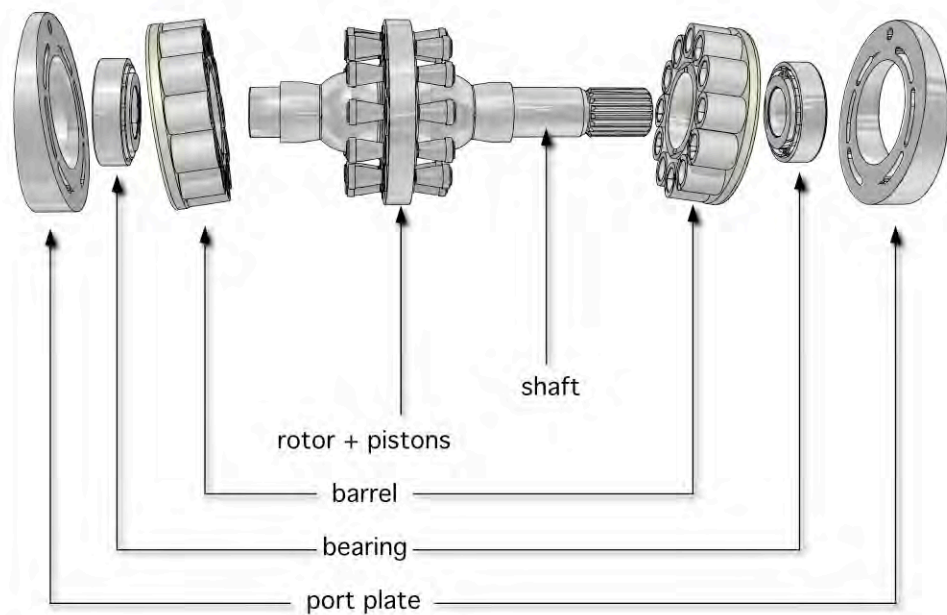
Exploded view of the main parts of the rotating group of the floating cup pump
